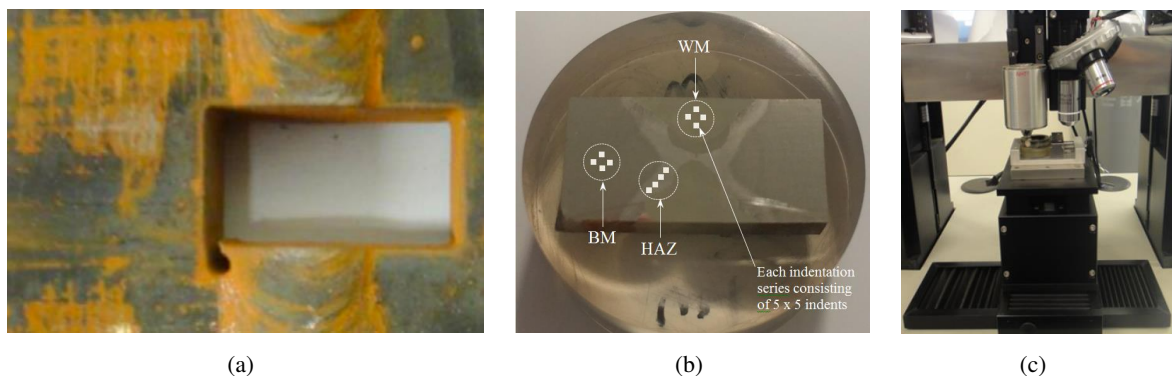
(a) Cut-out from the welded plate by water jet, (b) Indenting positions in each region and (c) Sample installed in the indentation test machine
